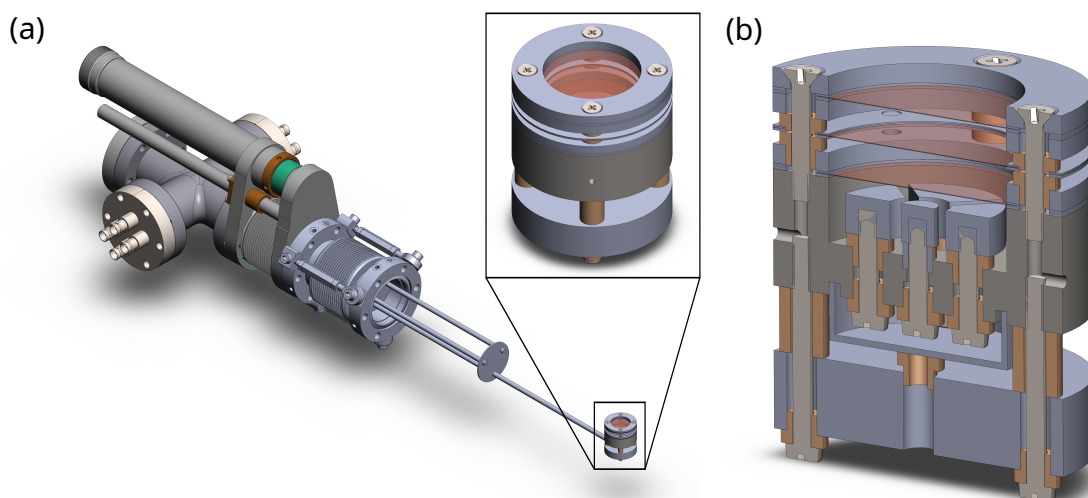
CAD drawings of the five-electrode Faraday cup. (a) Full assembly consisting of four-way CF-40 cross, linear transfer, port aligner, two BNC feedthroughs with 4 connections each, blind flange with threaded rods that hold the Faraday cup (inset) at the other end. (b) Cut view of the Faraday cup with the main parts from bottom to top: the base plate where the threaded rod is connected, casing with the five electrodes inside (darker gray), stack of three copper grids. Ceramic parts are illustrated in brown.
